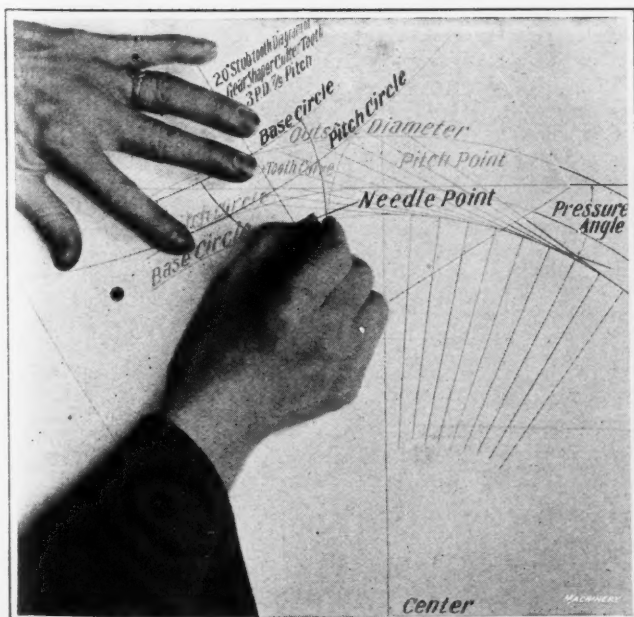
Last Step in laying out Flank and Fillet of a Gear Tooth
